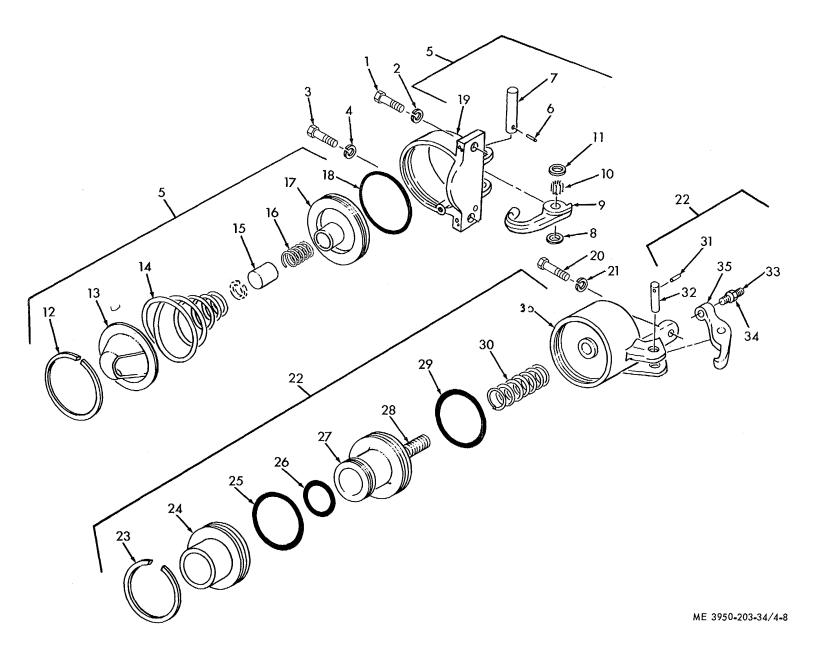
Front and rear servos, exploded view. 4-10
